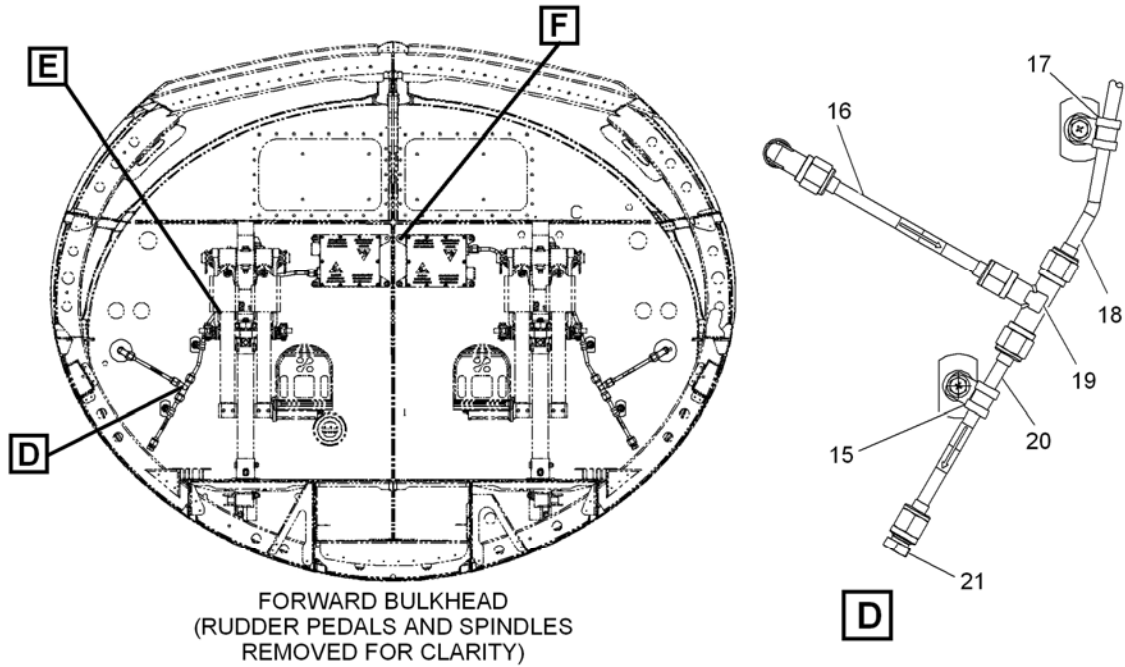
Pitot/AOA Assembly Installation (Sheet 2 of 2)
